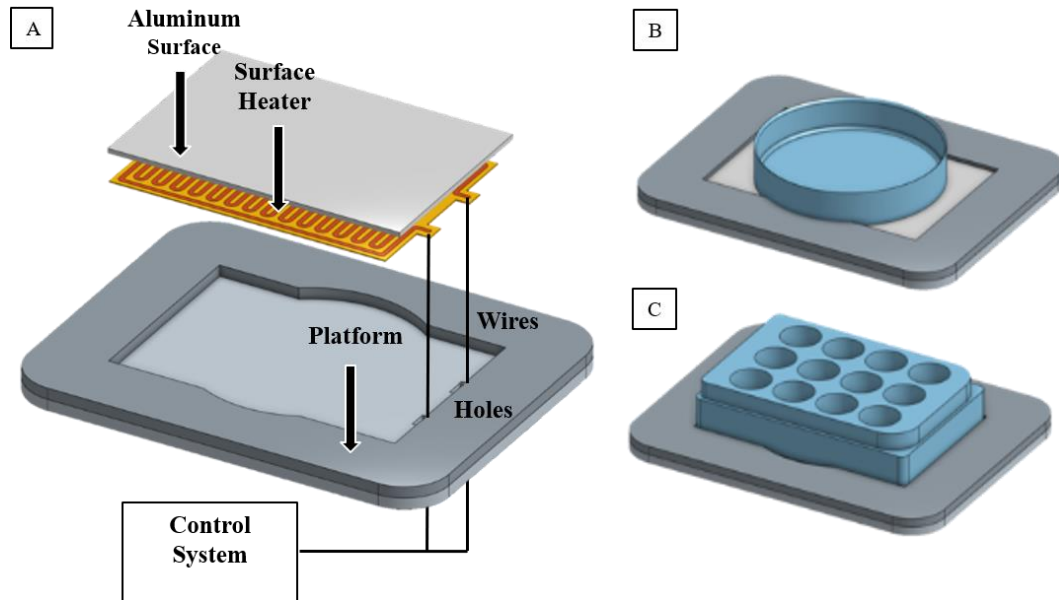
(A) Model of the 3D printed printing platform with the holes and the surface heater. (B, C) Model of the platform with a petri dish and a multiwell plate, respectively
